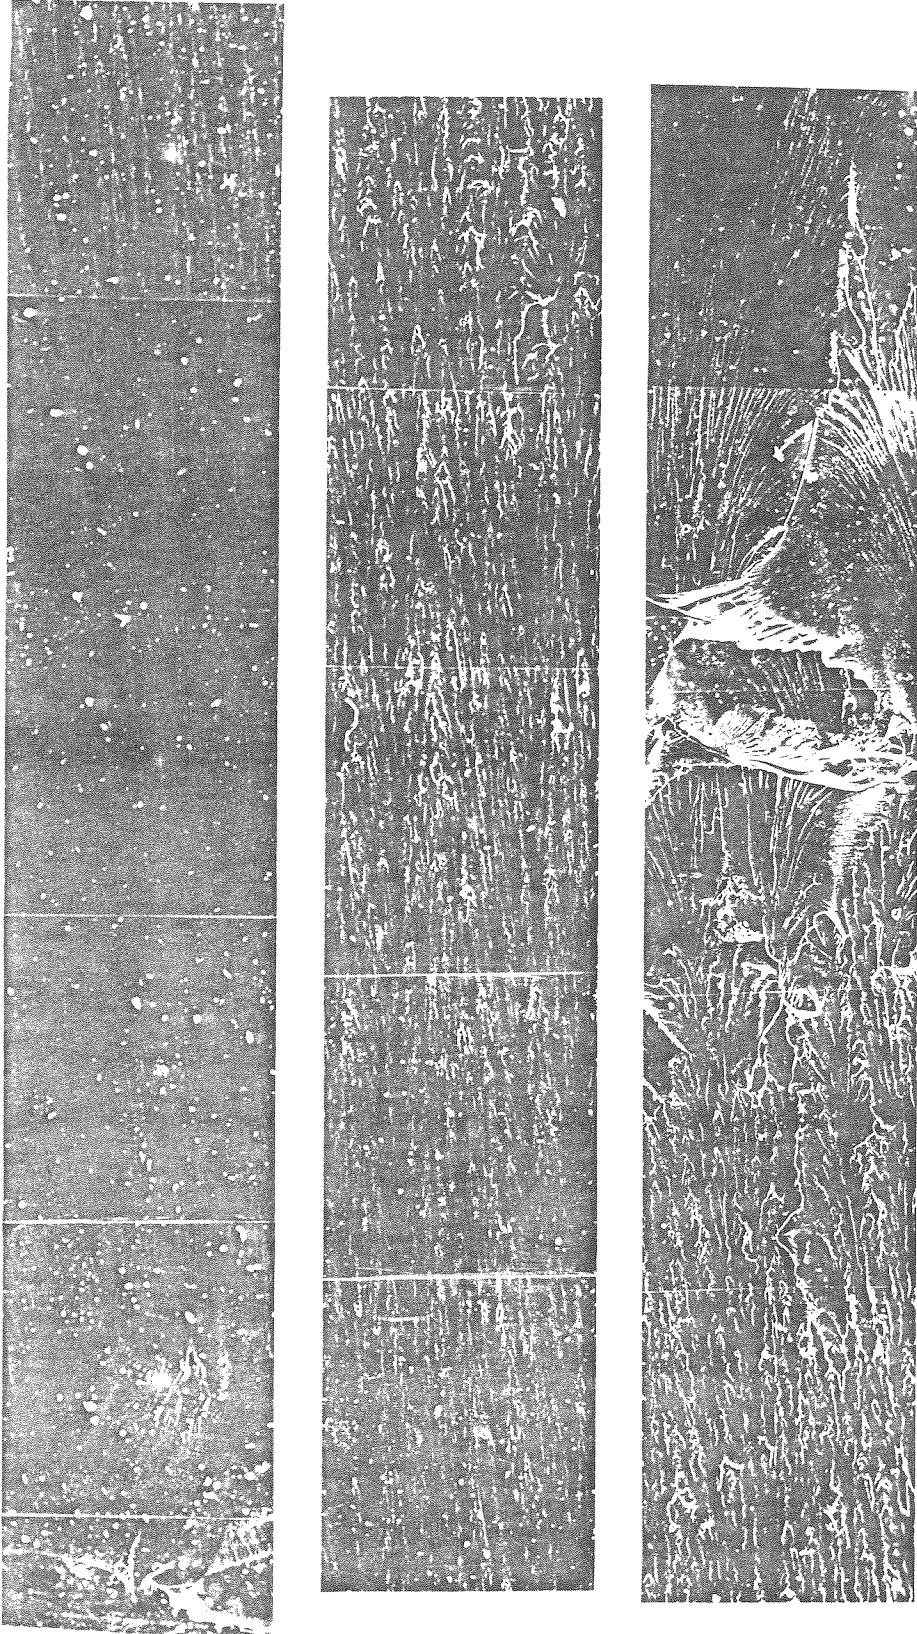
Fracture surface showing continuous change in roughness.
